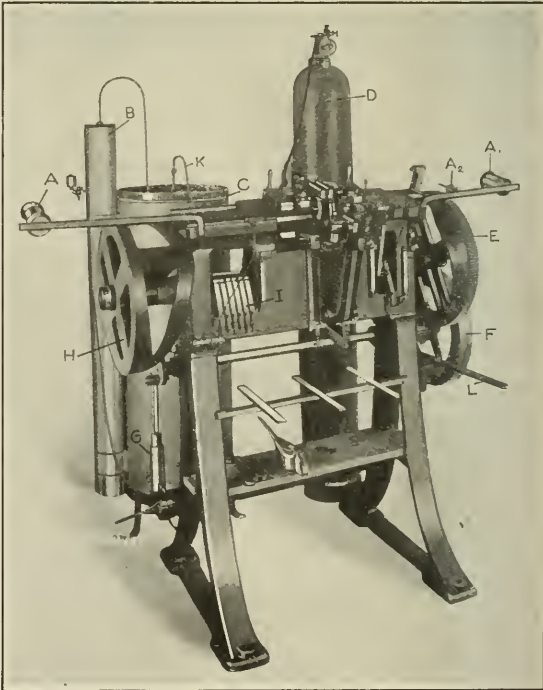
Automatic Machine for welding Lead-in Wires
